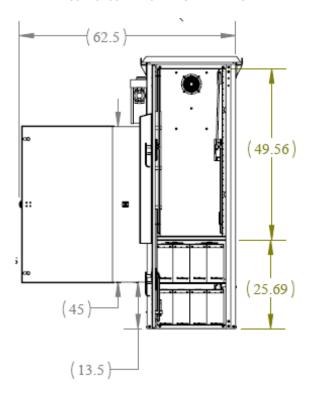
FRONT DIMENSIONAL VIEW OF THE LTEE-OD.
